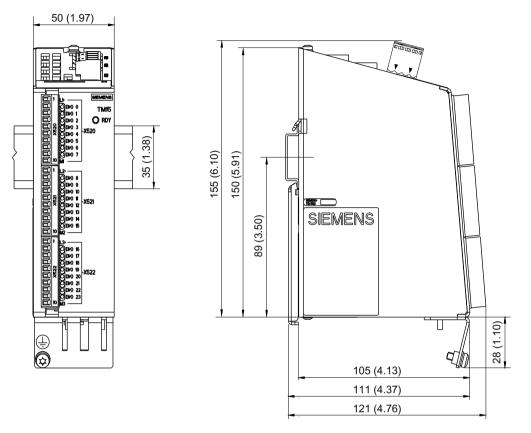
Dimension drawing of Terminal Module TM15, all data in mm and (inches)
